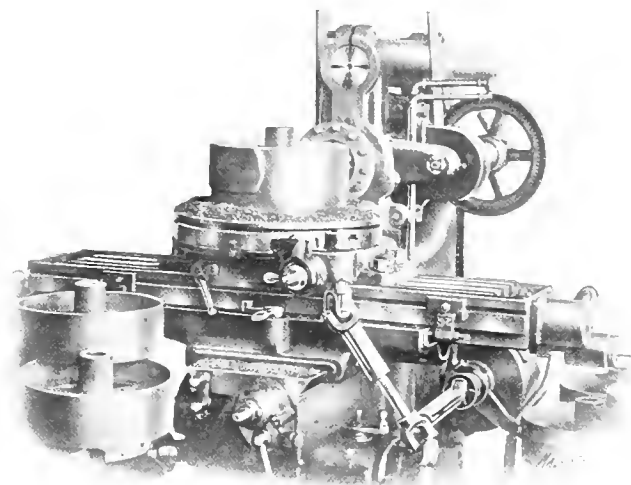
Kempsmith Horizontal Circular Milling and Indexing Attachment being used for Pulley Crowning.
